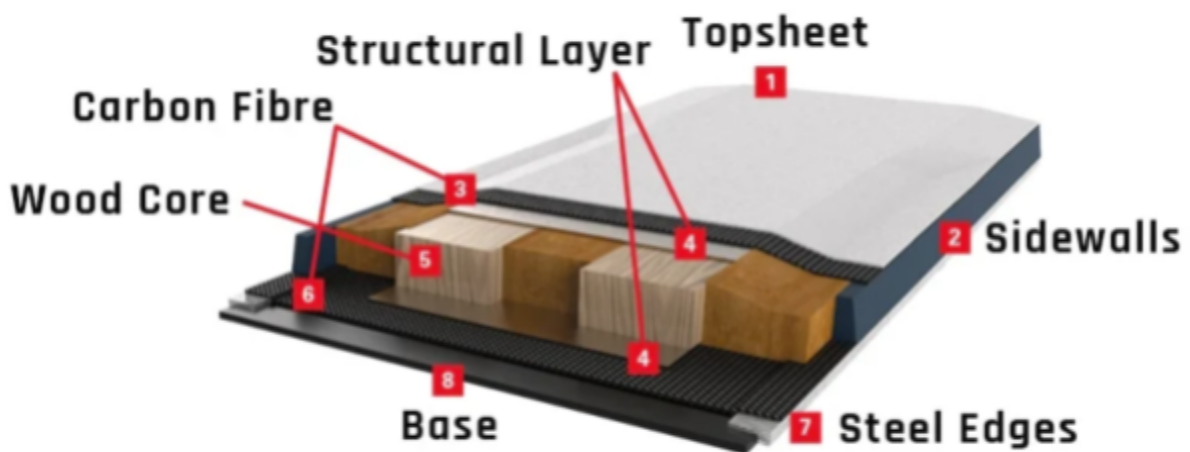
Cross section of a common ski construction with a wooden core, dual structural layer and ABS sidewall construction. [5]
